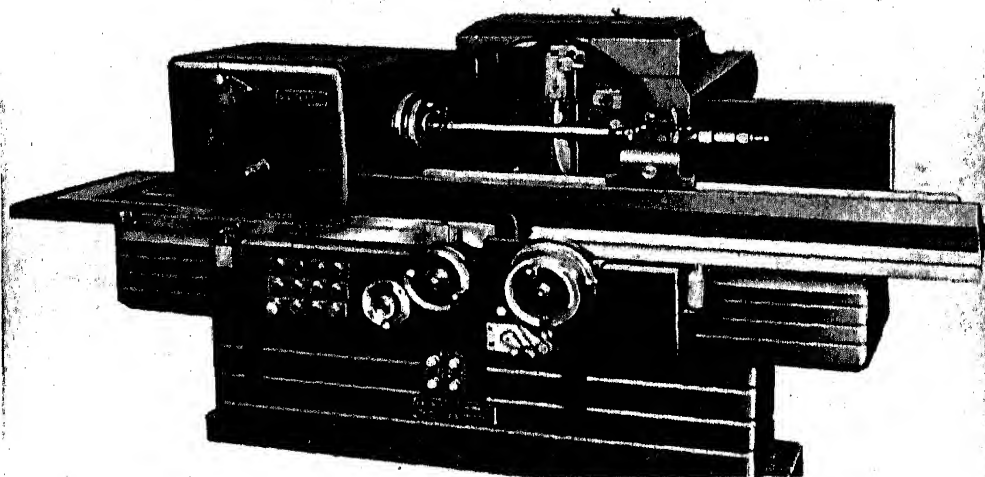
A universal thread grinding machine for diameters up to 12 inches. (Courtesy Ex-Cell-O Corp.)
